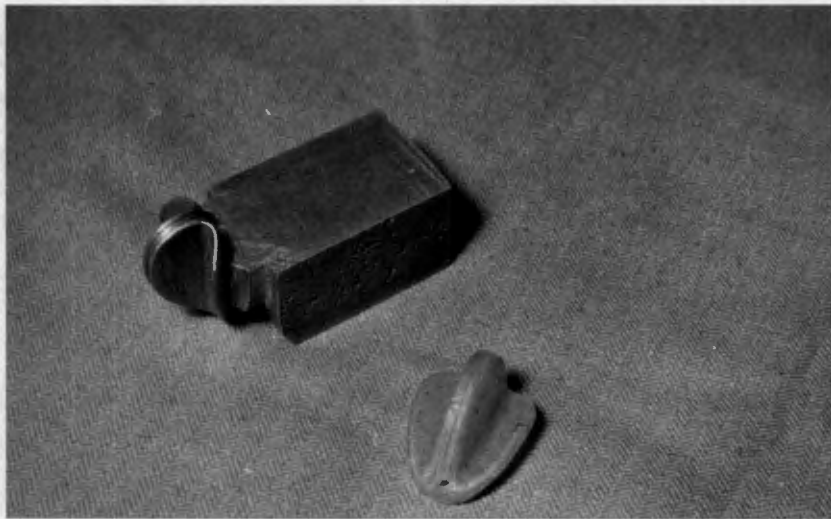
White-metal "positive" mould of Valve V and a latex-rubber valve manufactured on this mould.
